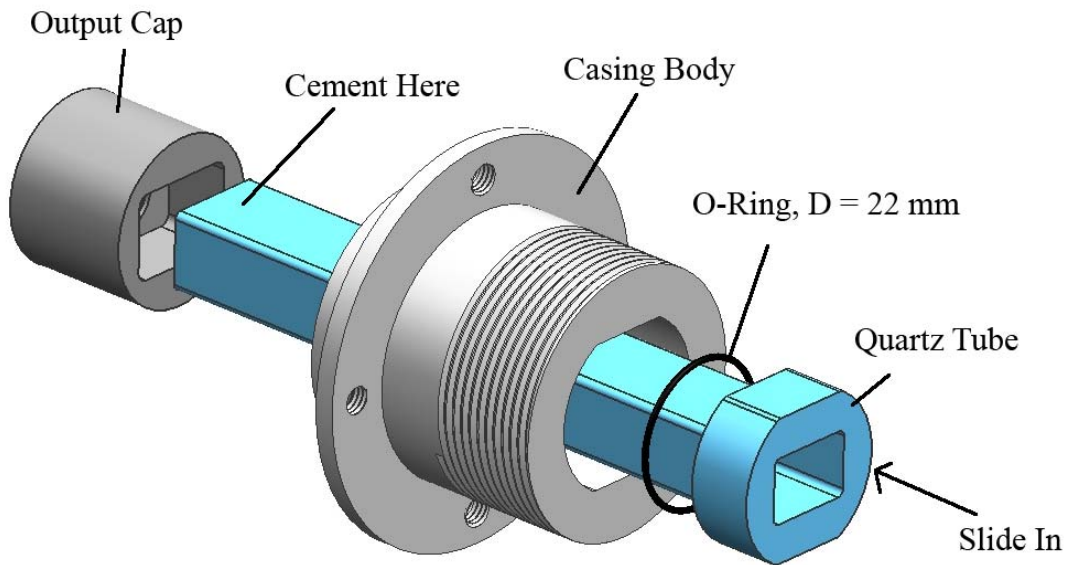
Slide in Quartz Tube into Casing Body and Cement the Free End into Output Cap
